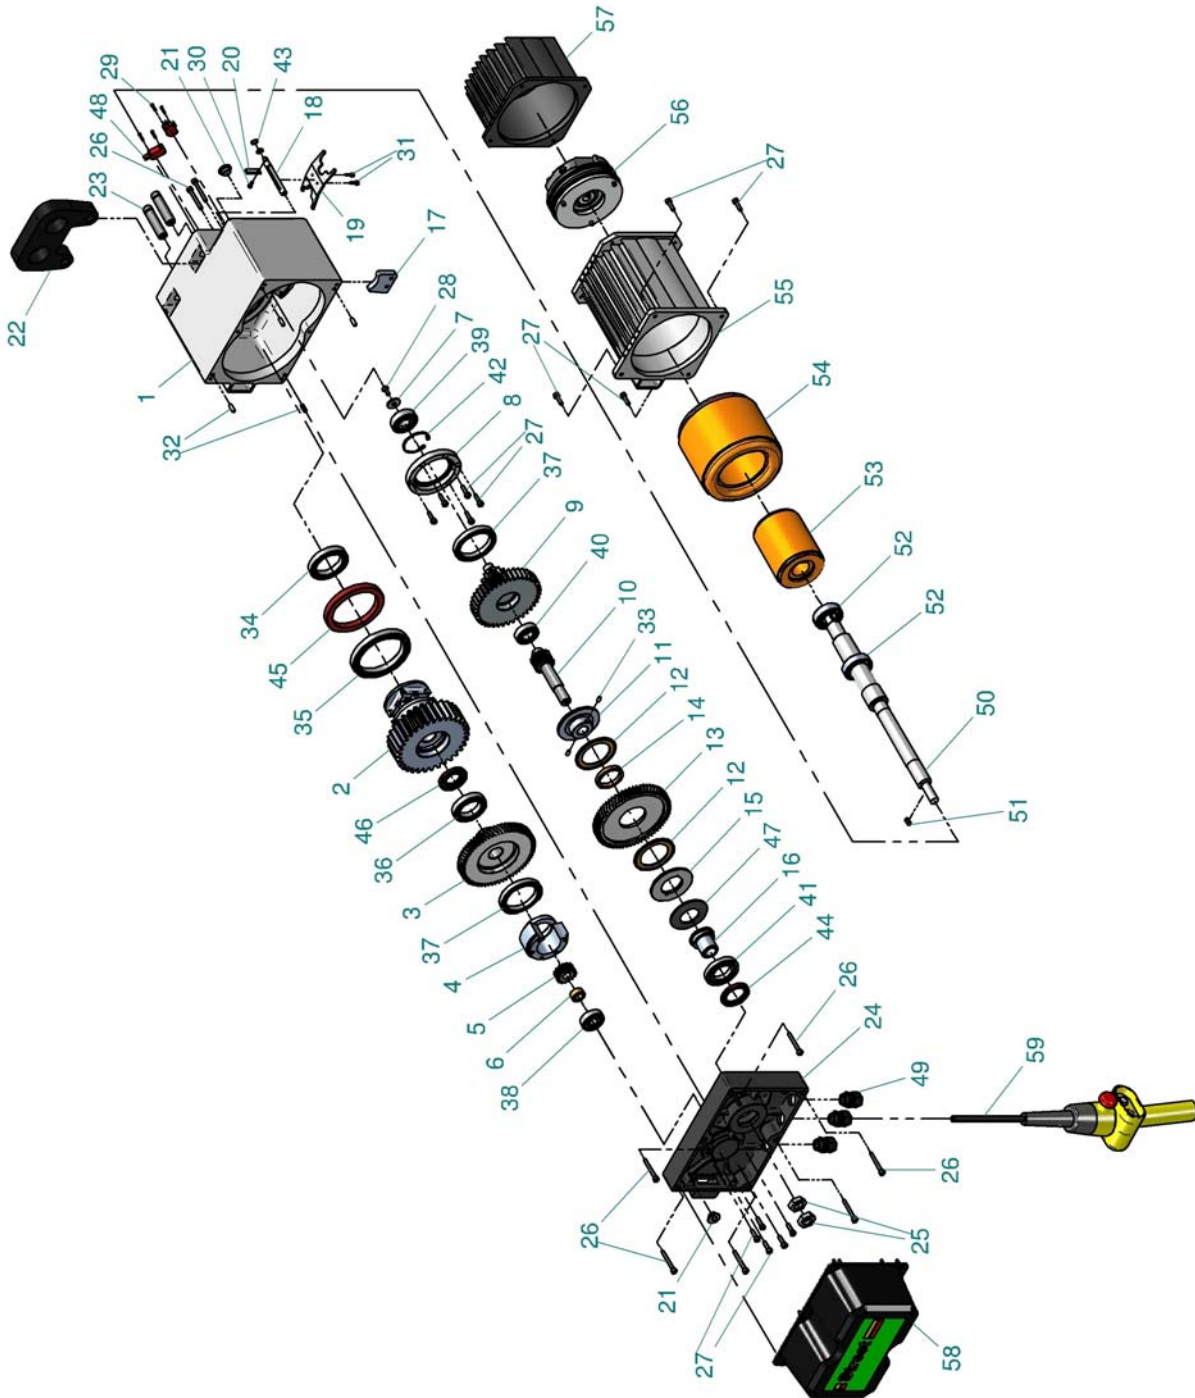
Hoist Exploded View (LX3 Version 'A')
